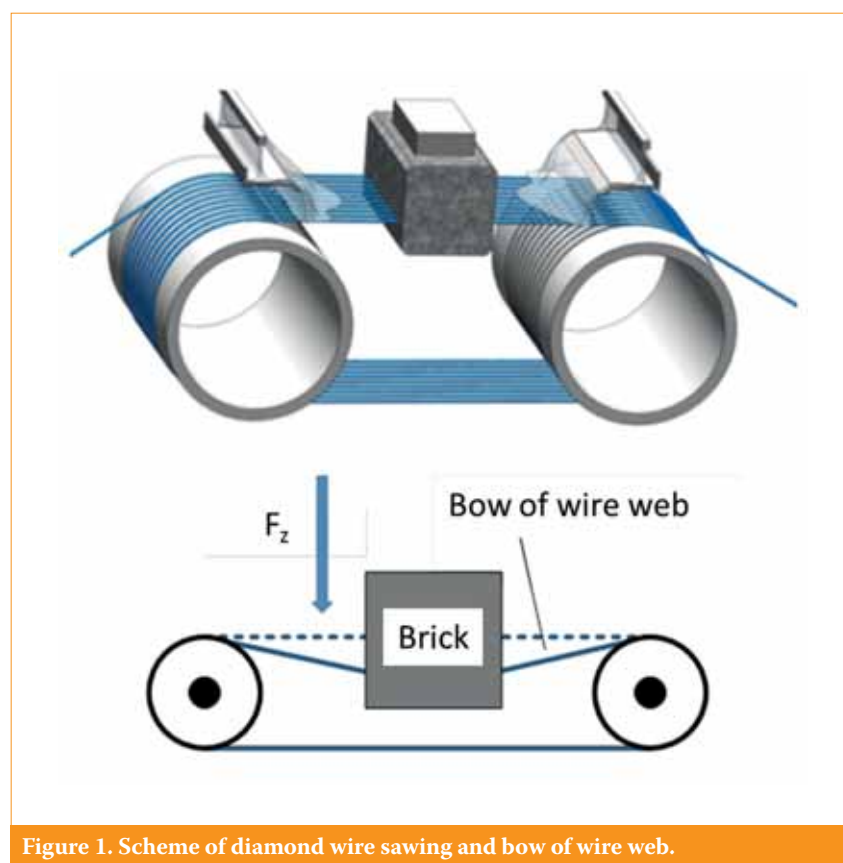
Scheme of diamond wire sawing and bow of wire web.
